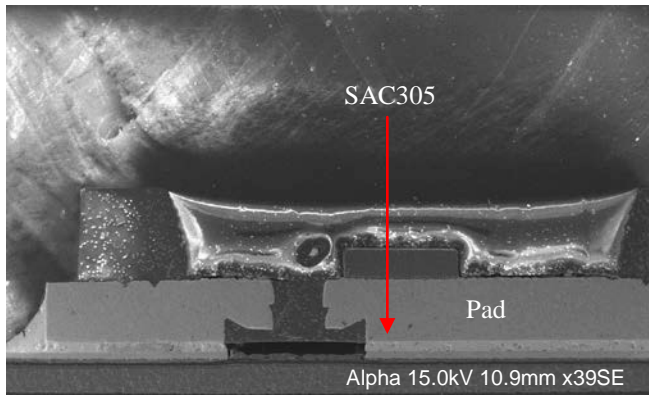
B. Solder Edge View of LED Package on PET with SBX02
